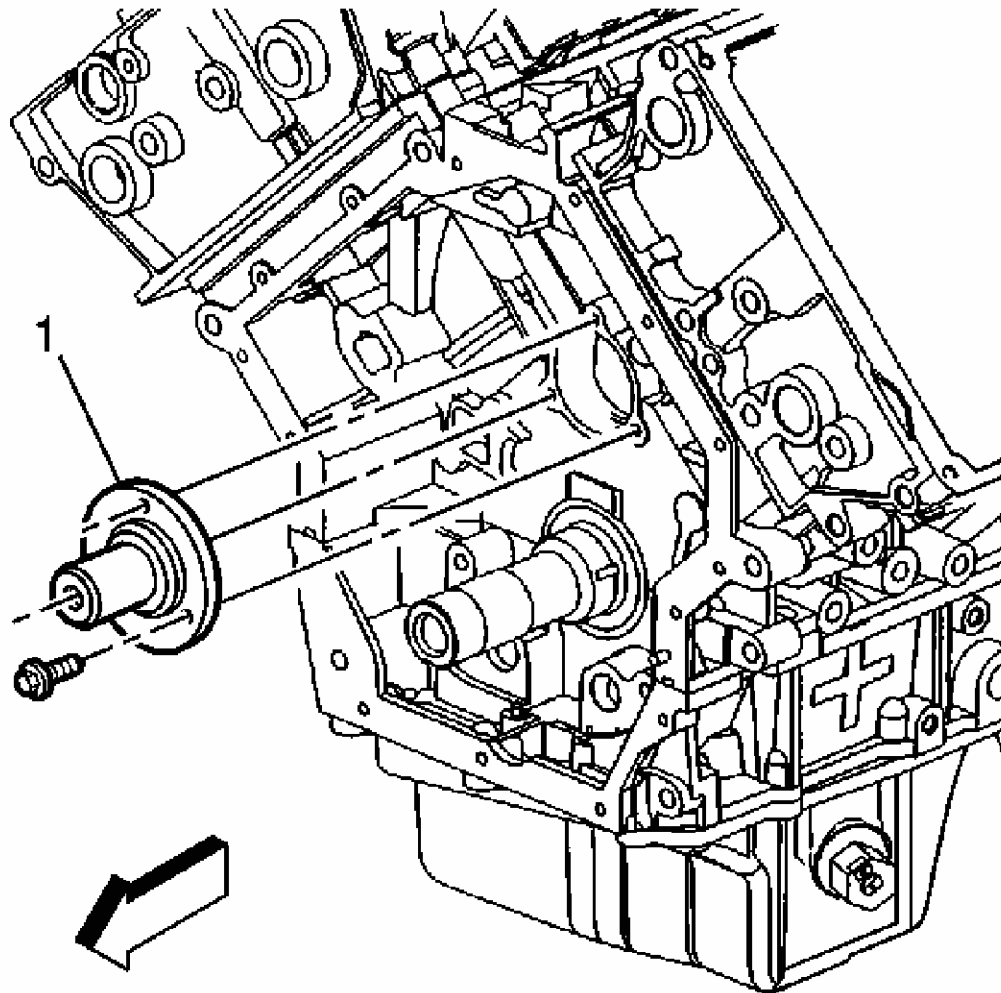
Identifying Camshaft Intermediate Driveshaft
